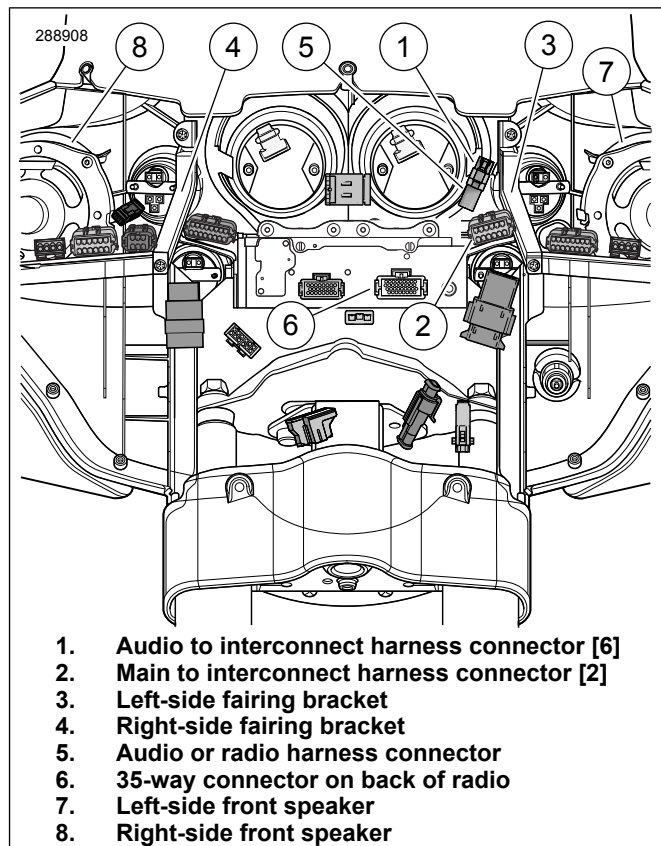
Inner Fairing Connectors (FLHX, FLHT/C/U)
